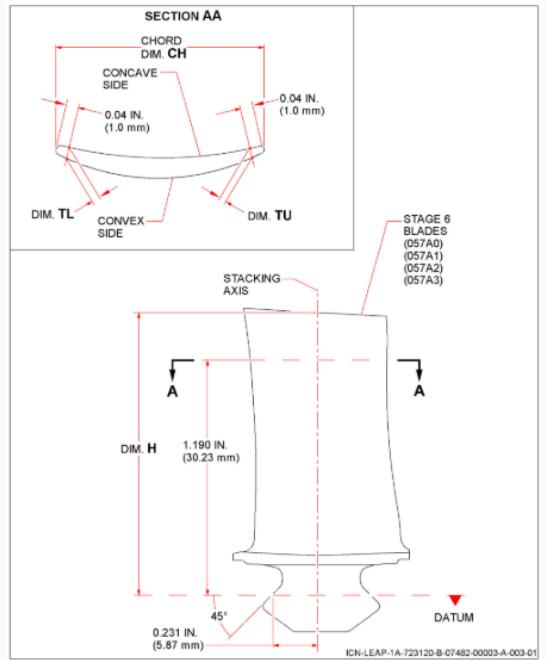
Stage 6 Blade Dimension Check.[\[12\]](#)
